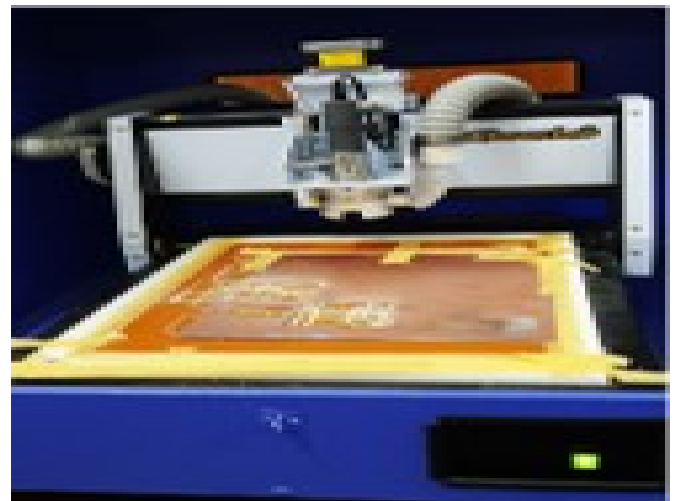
Photograph of the MITS Eleven Lab Machine.
